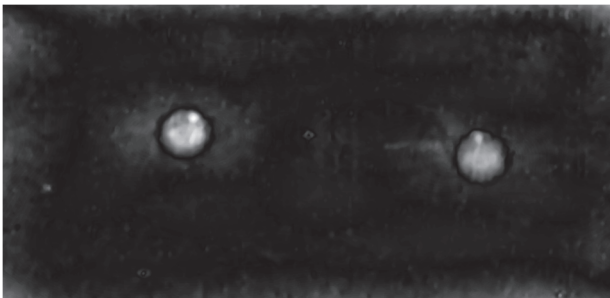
Enhancement of spot welding X-ray images through filtering
